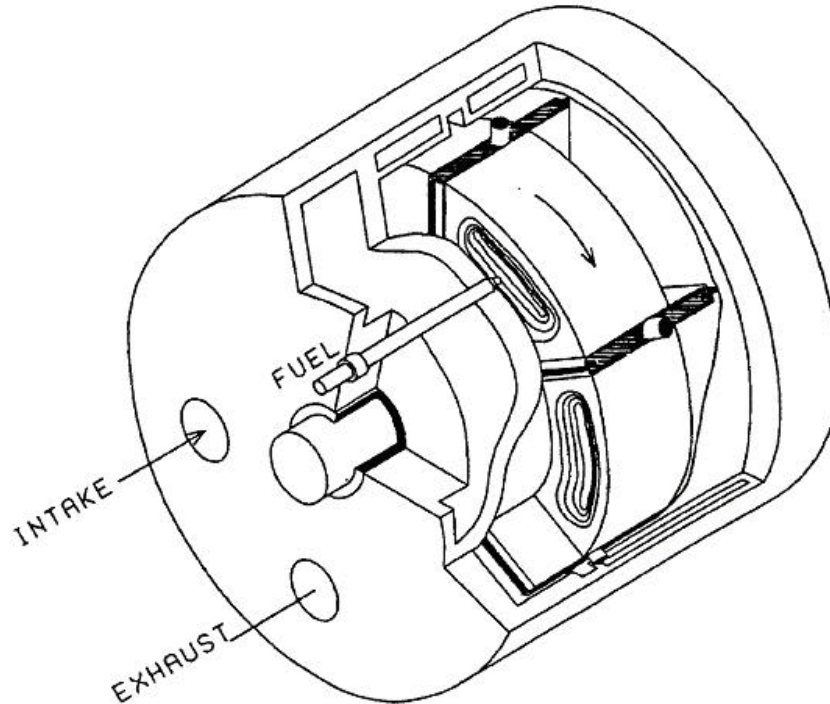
Rand Cam engine cutaway showing intake/exhaust ports, fuel injector, and combustion chamber geometry ⁽⁵⁾
